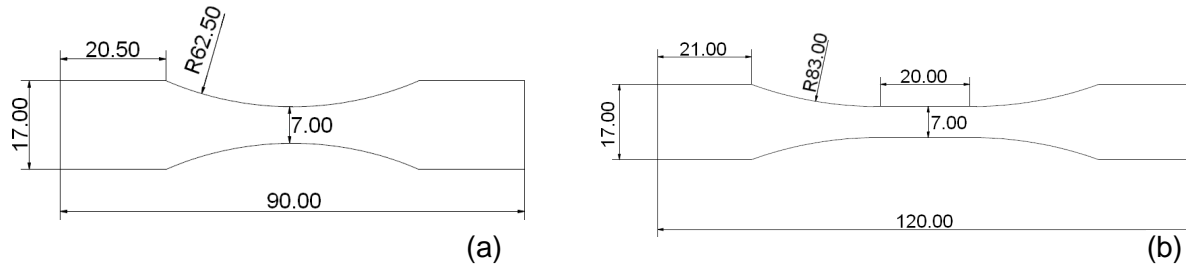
(a) Base material and (b) cross-weld specimen geometry for fatigue testing
